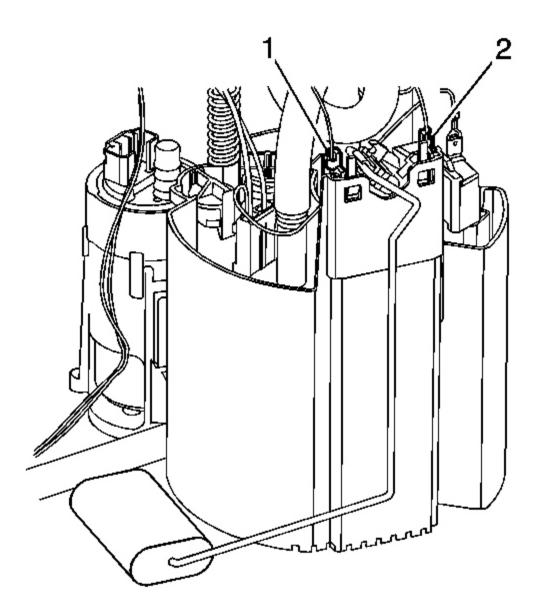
Ensuring Sender Caps Snaps Onto Place Courtesy of GENERAL MOTORS CORP.
